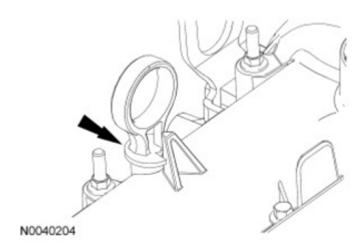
Locating Oil Level Indicator Courtesy of FORD MOTOR CO.
